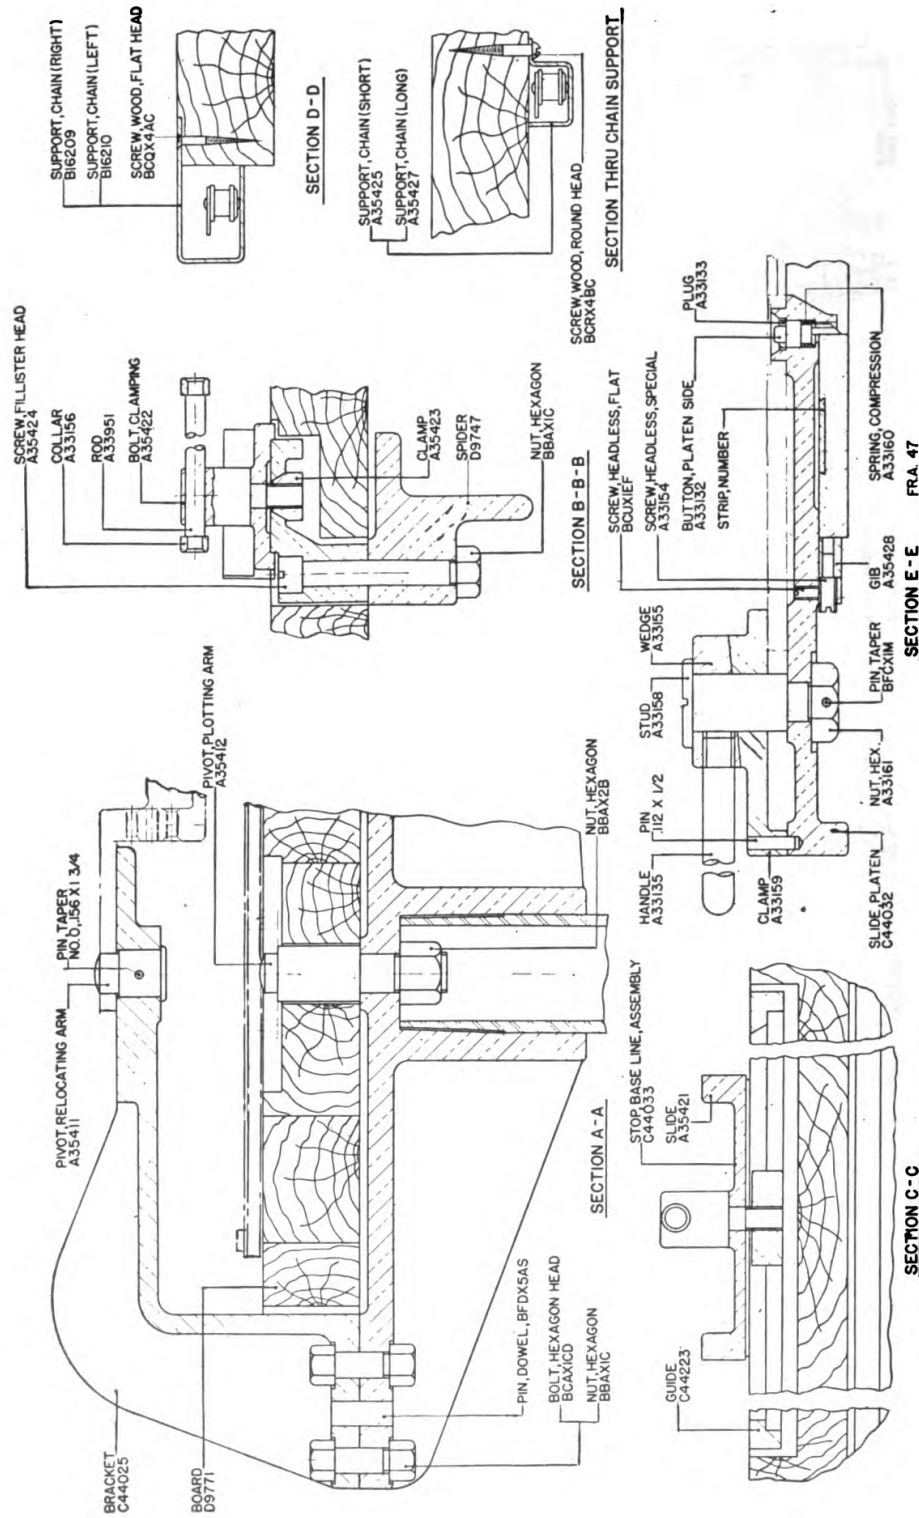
Plotting and relocating board M1—sectioned views.
